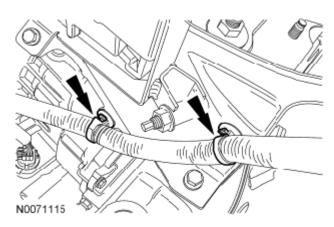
Locating Positive Battery Cable Wire Harness Retainer Courtesy of FORD MOTOR CO.
